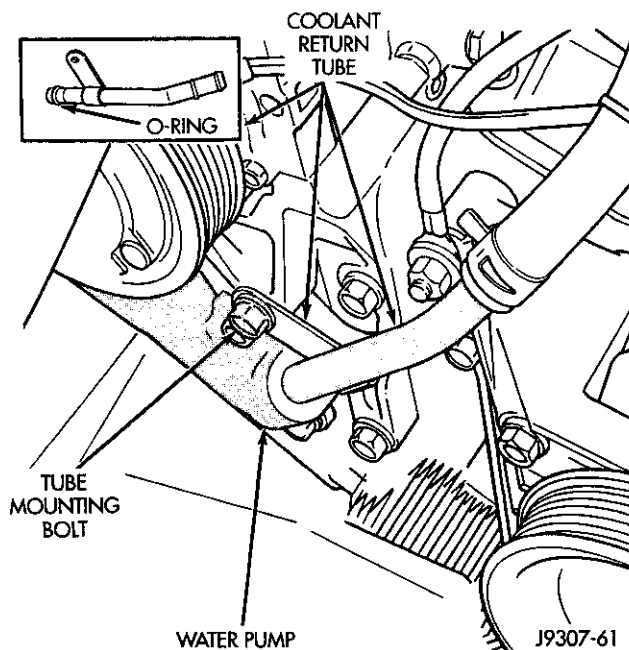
Coolant Return Tube—5.9L HDC-Gas Engine
